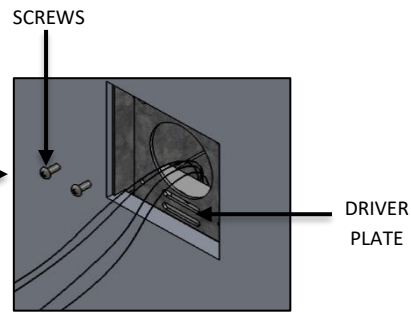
DETAIL SHOWING SCREW INSTALLATION
